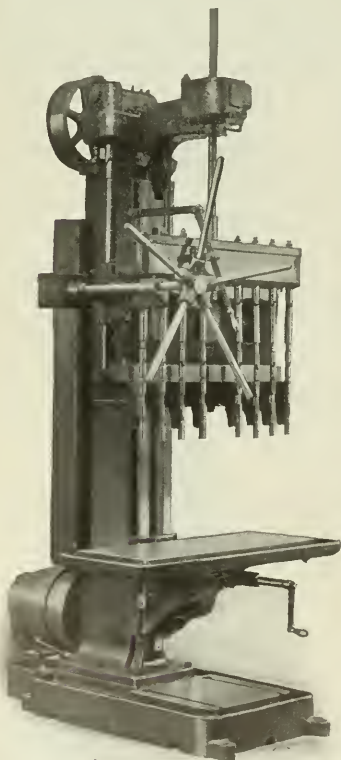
"Natco" No. 39 Straight-line Drilling Machine
